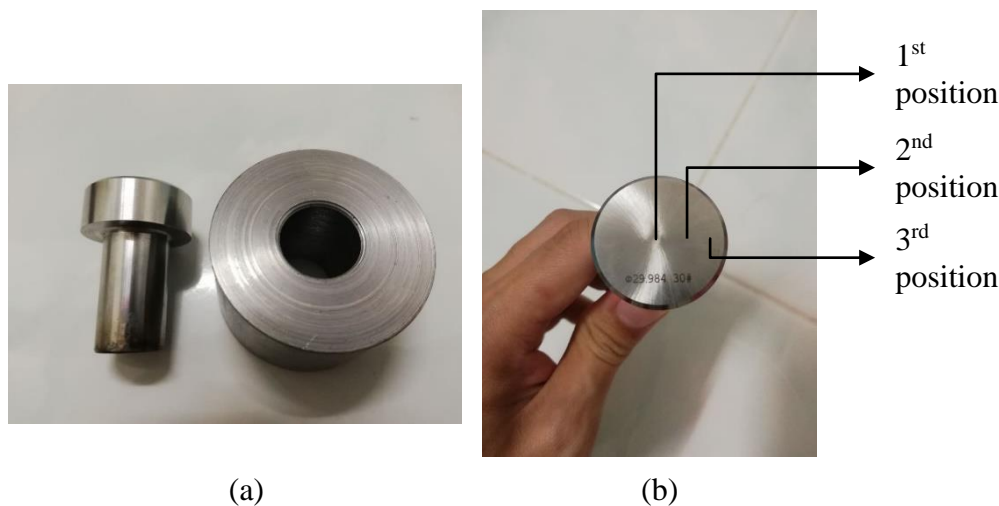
(a) Modified Hardness Test Specimen with Hollow Cylindrical Block (b) Three Testing Positions Labelled on The Specimen Surface.
